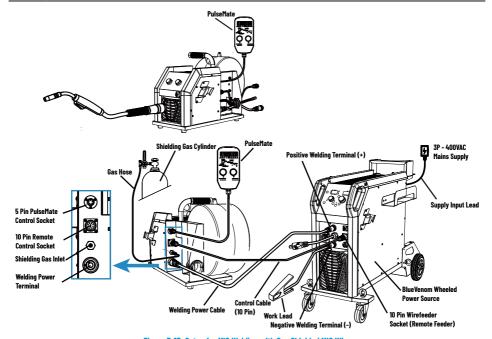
Setup for MIG Welding with Gas Shielded MIG Wire
